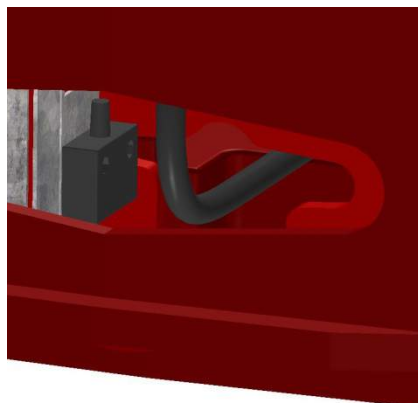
Inner bottom view. Hydraulic hose passing through the bollard head
